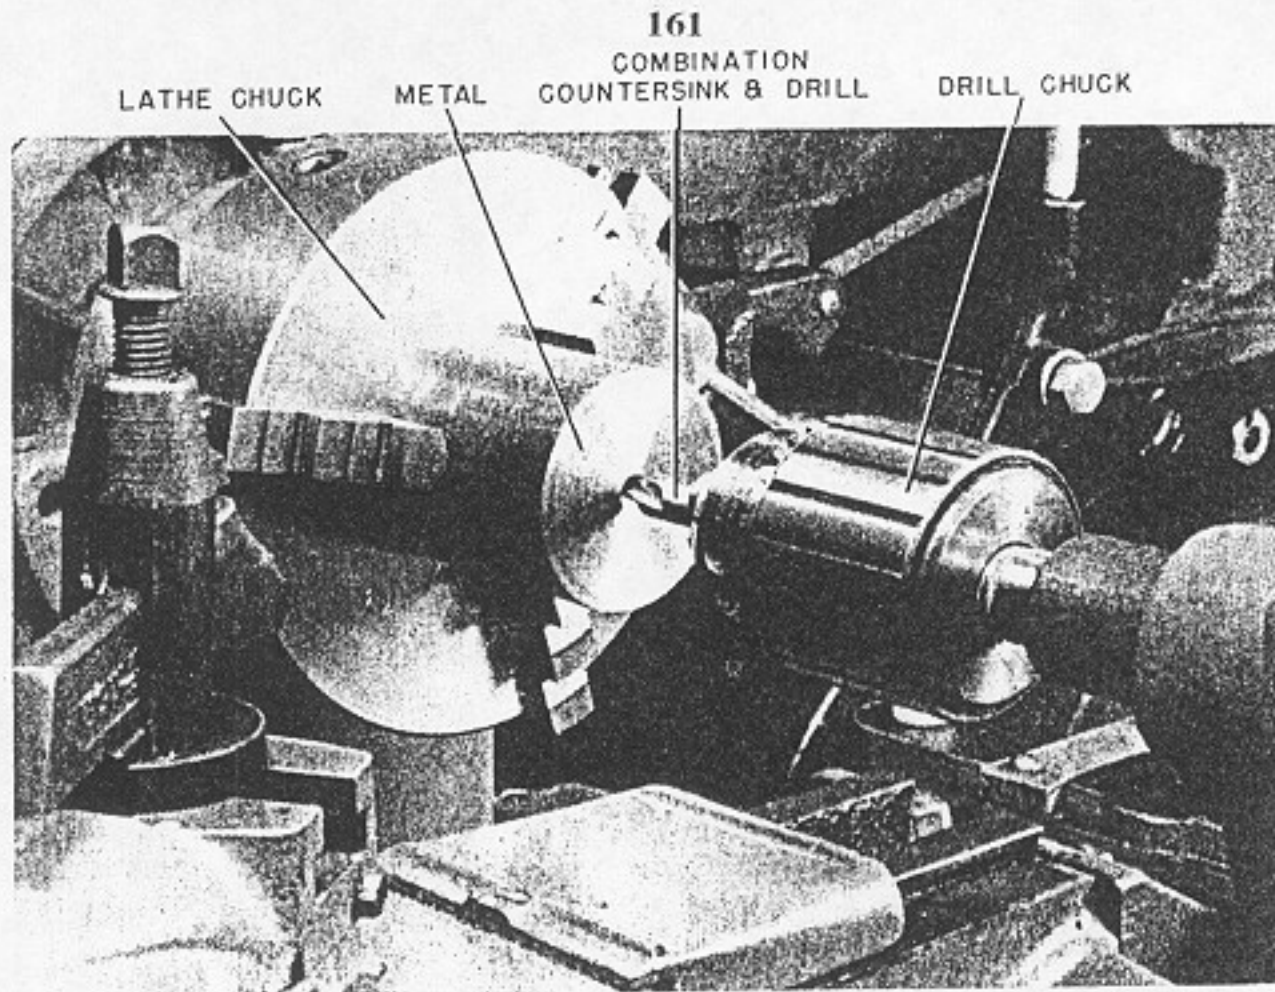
The small drill on the end of a drill and countersink combined breaks easily. Always run the lathe at a fast speed when using this drill.
